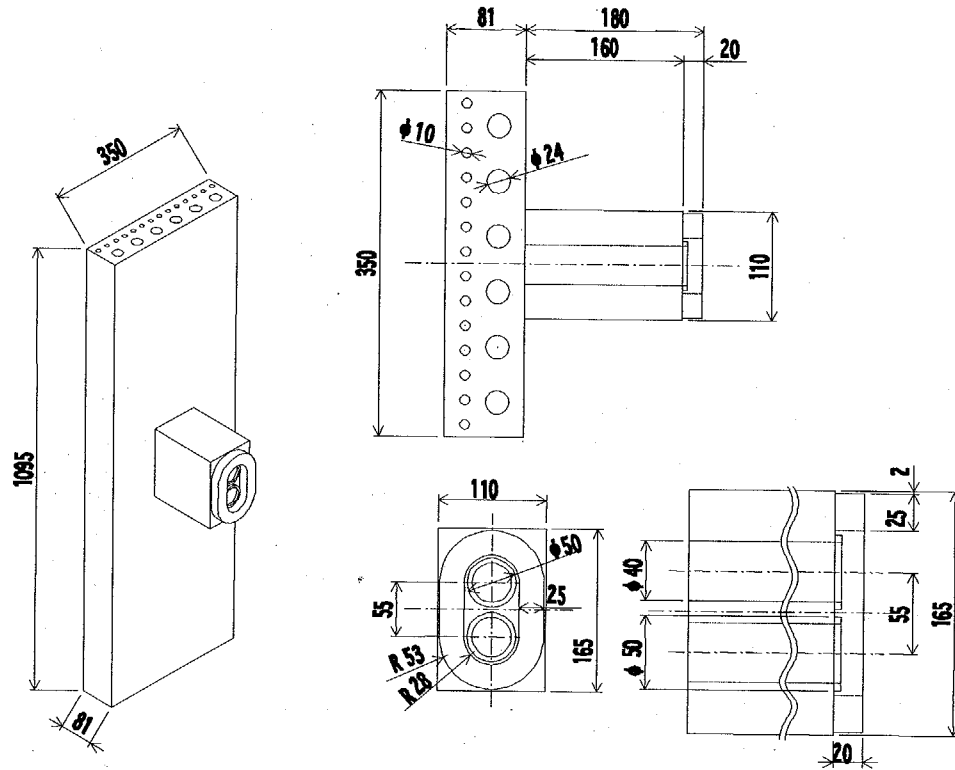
FW supporting beam (racetrack welding, beam length 180 mm)
